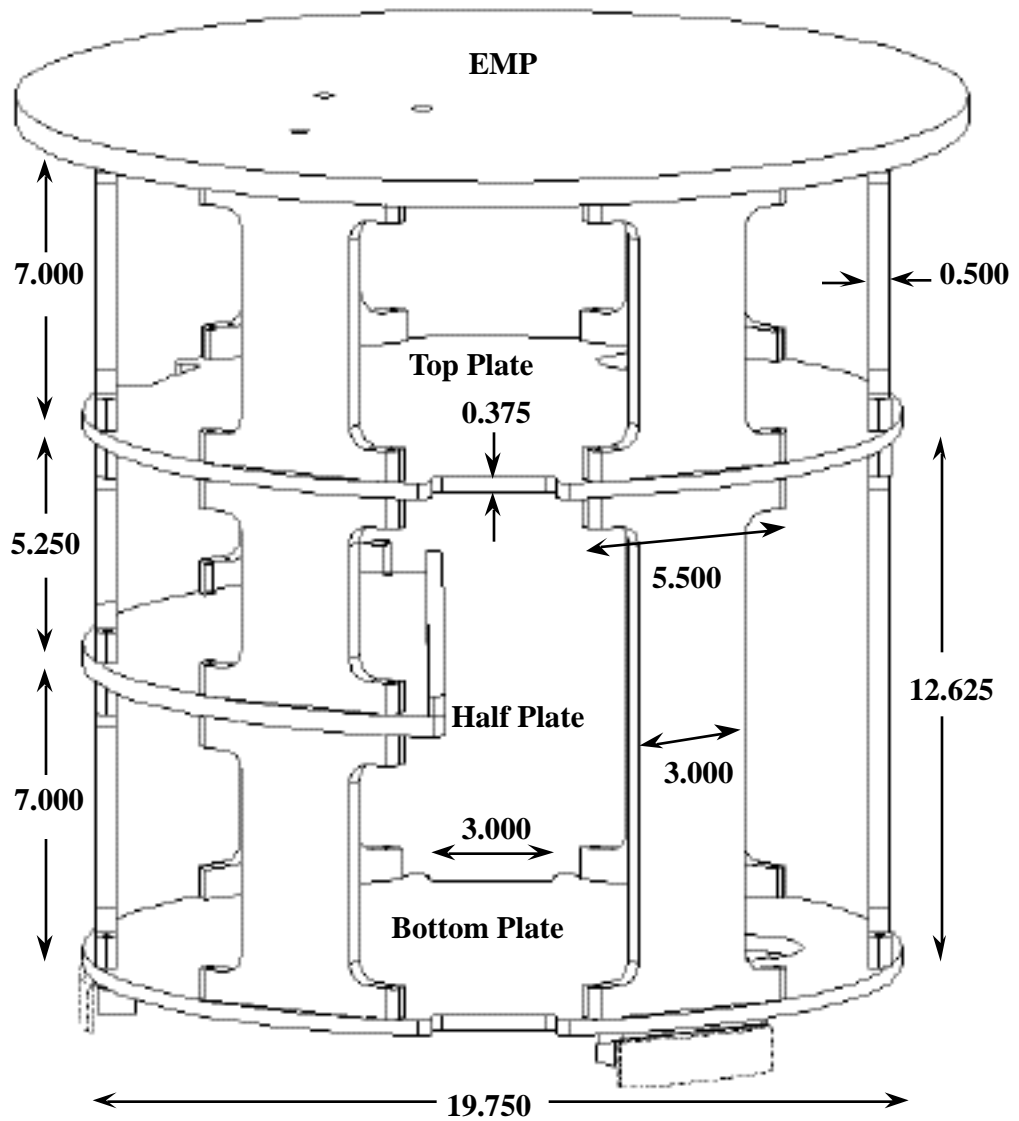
Dimensioned schematic of the G-093 equipment support structure
